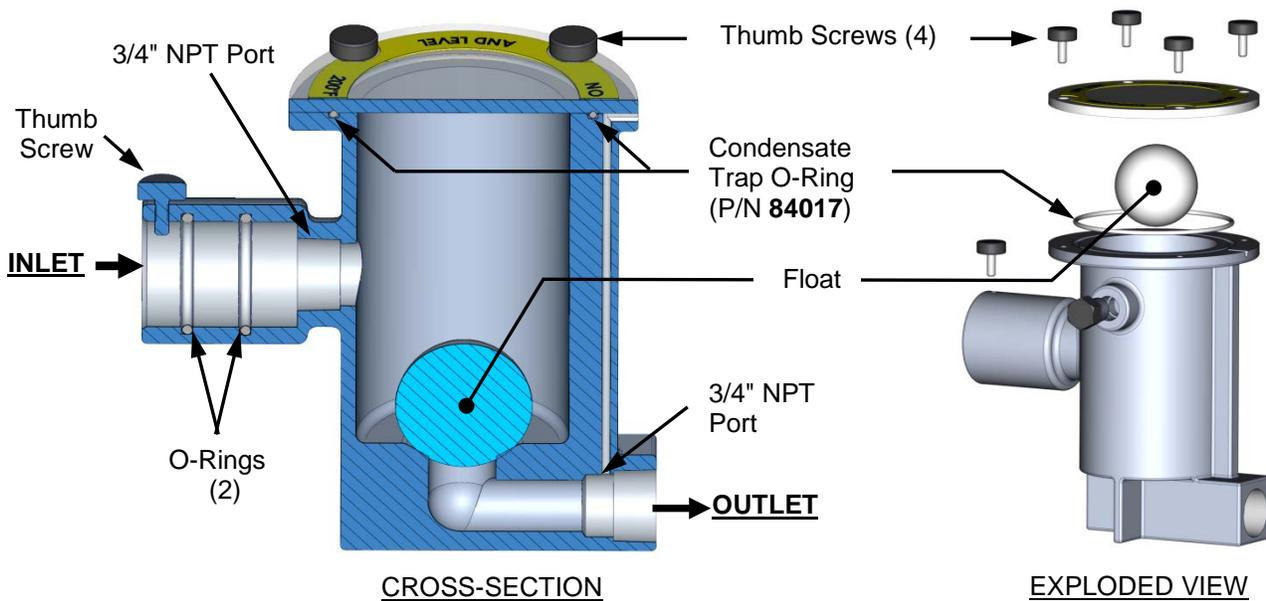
External Condensate Trap: Cross-Section & Exploded View
